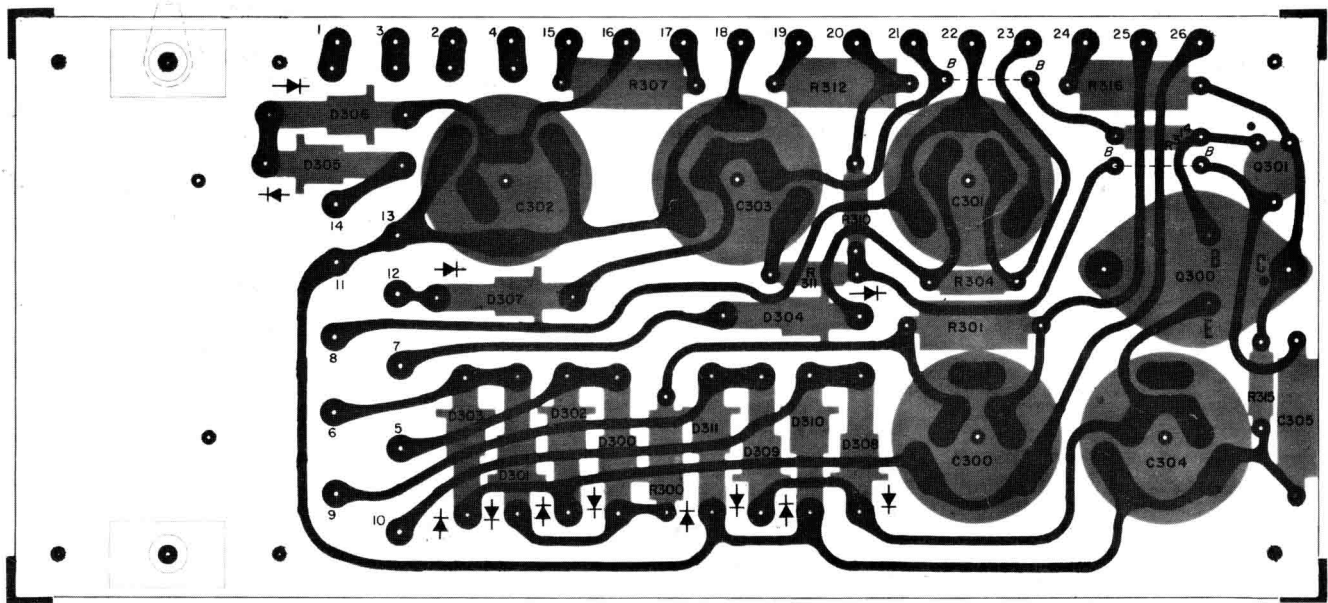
Etched-circuit board assembly, power supply (P/N 1608-2740).
